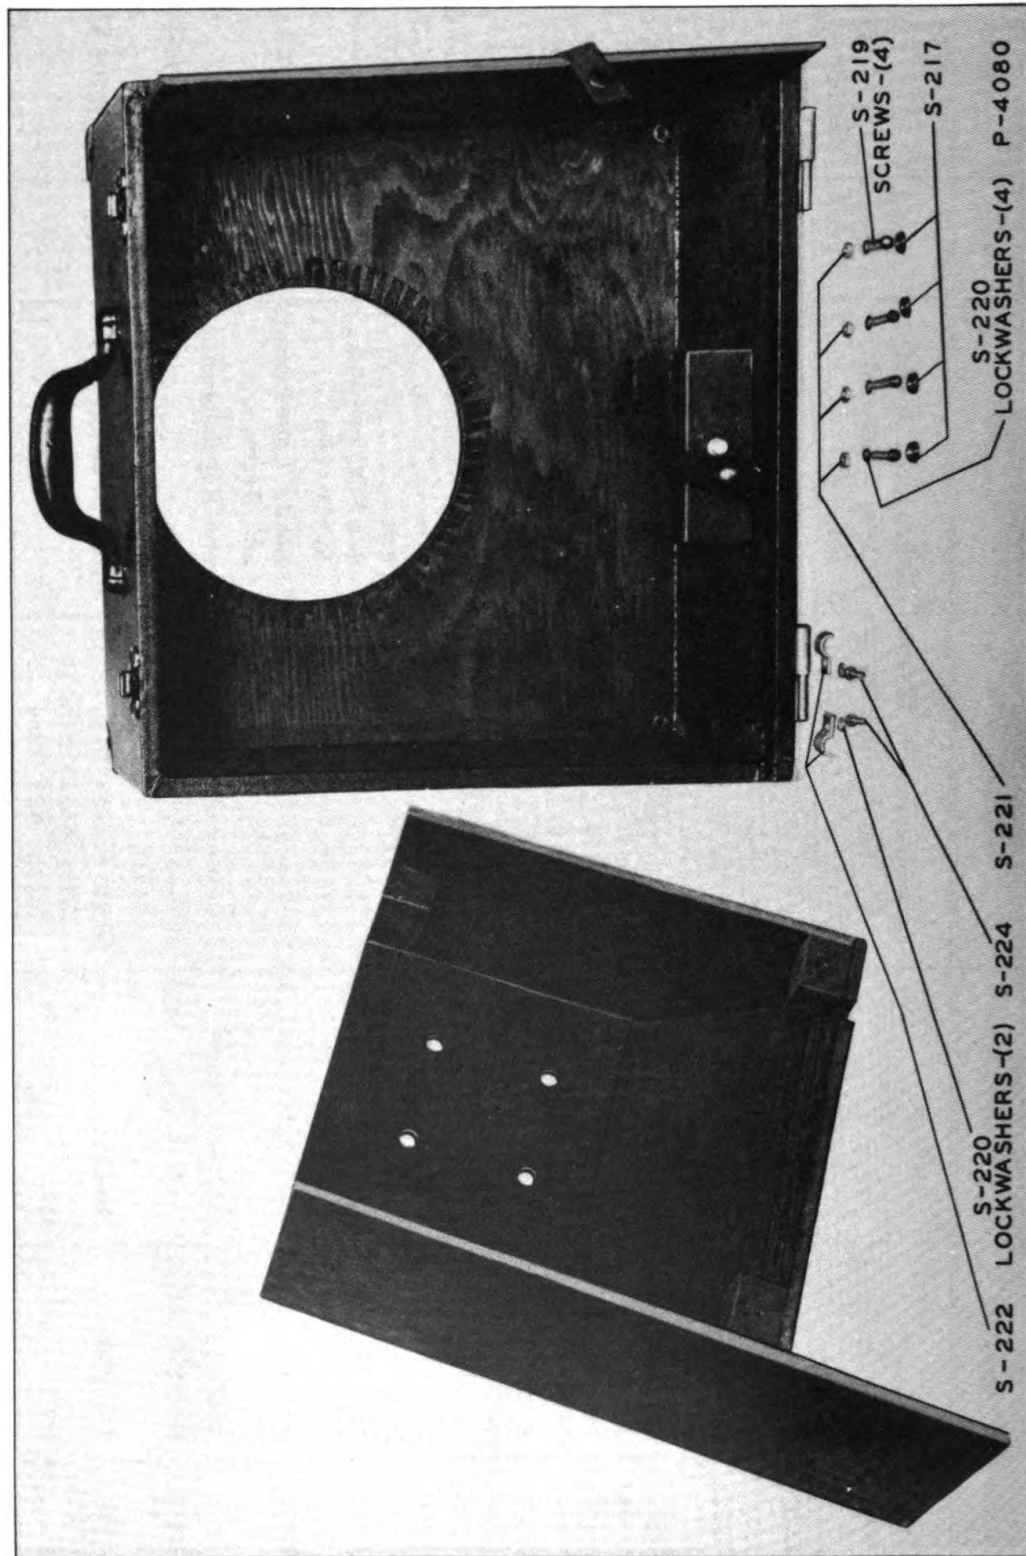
Loudspeaker Case—Disassembled—Parts Identification
